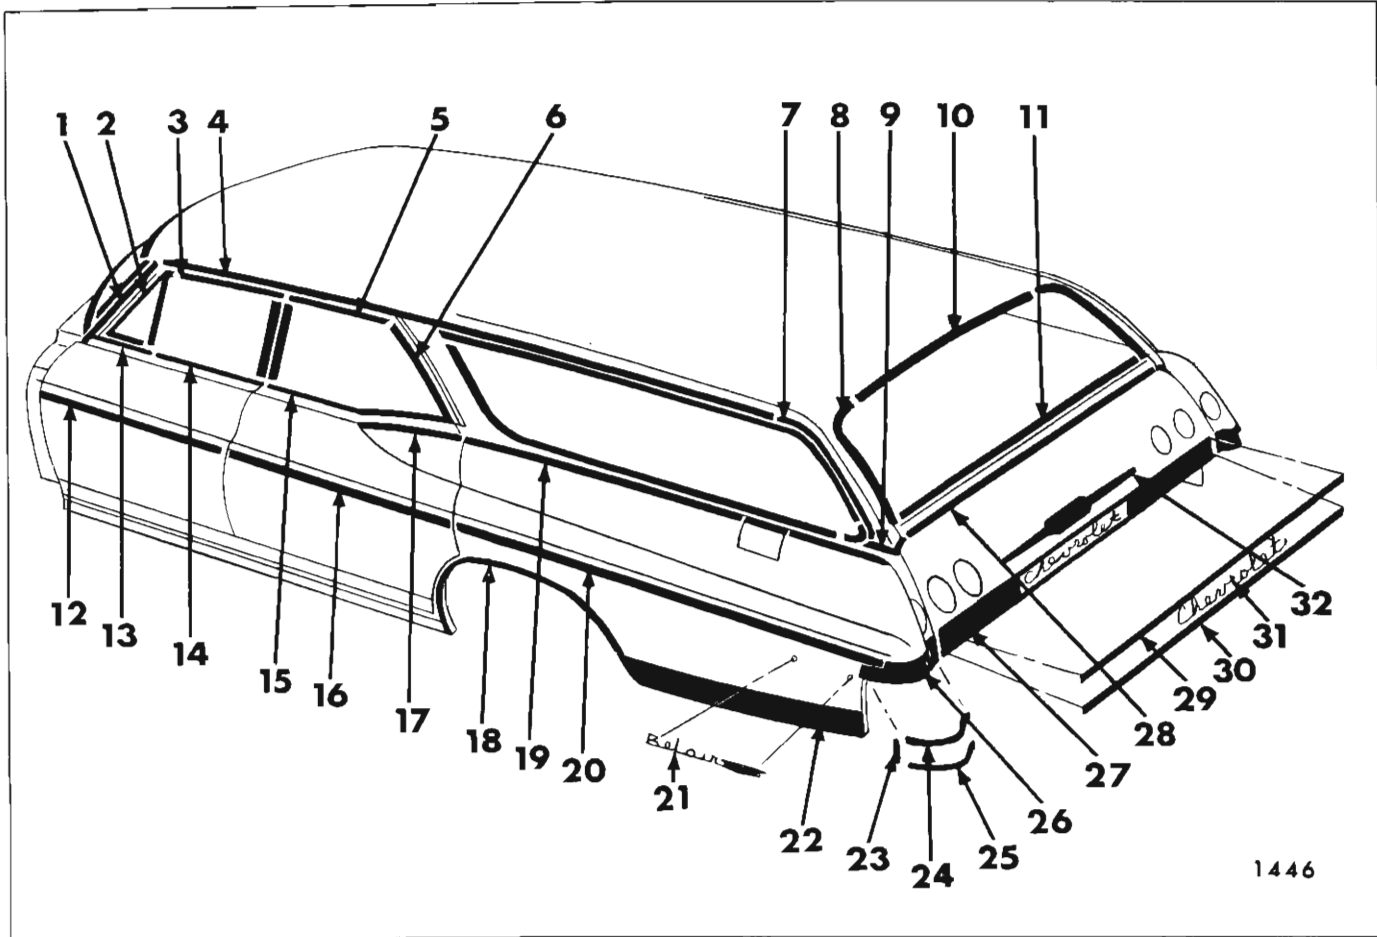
K3-15000-16000 Series "35"- "45" Styles
